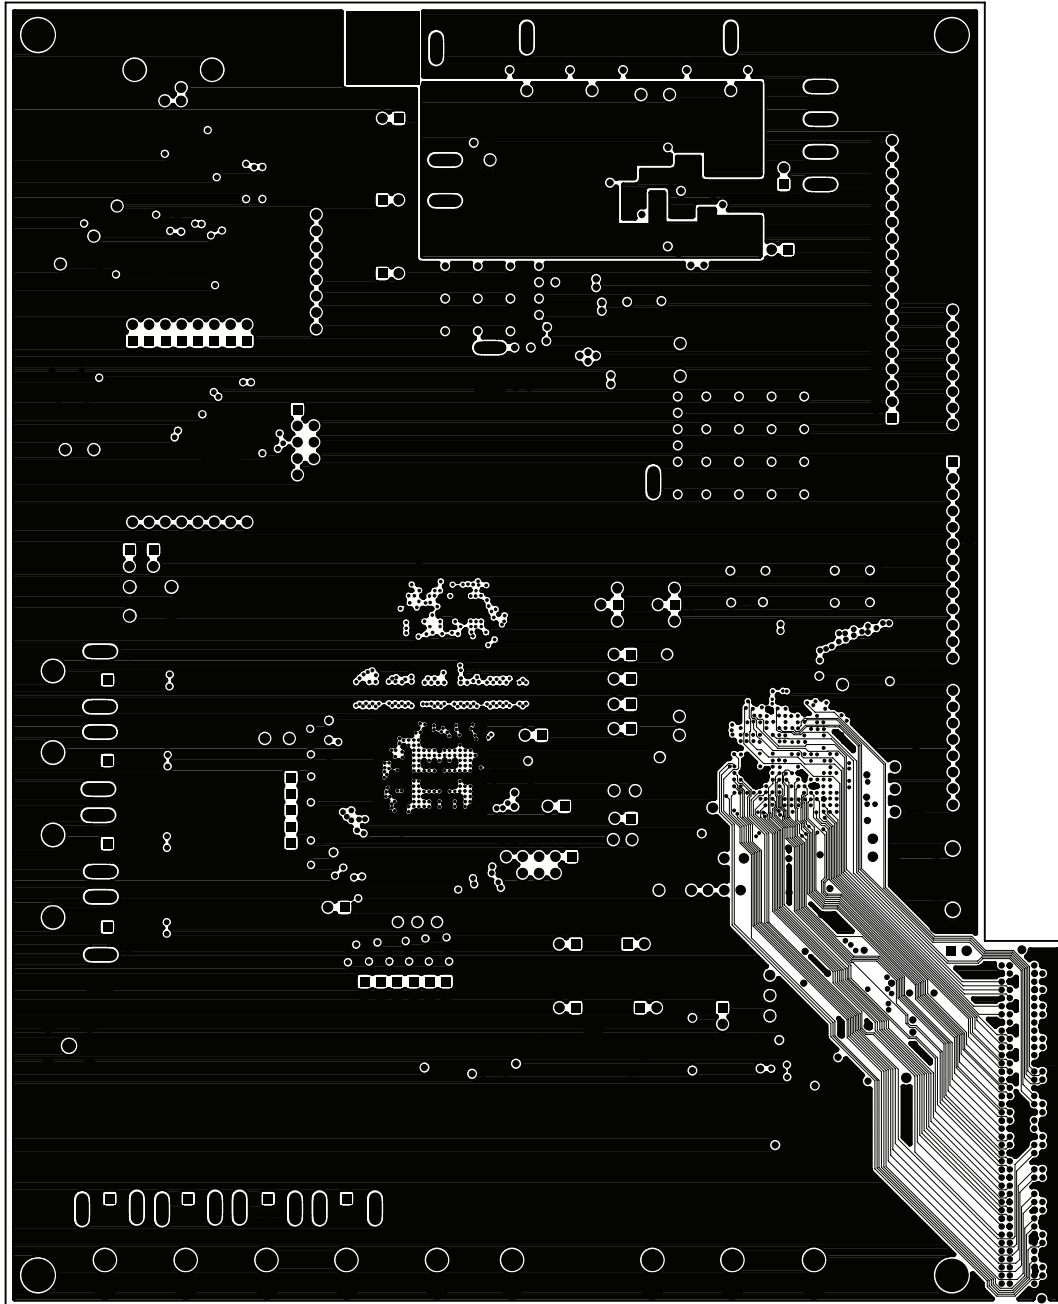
MAX9530 EV Kit PCB Layout—Layer 4
